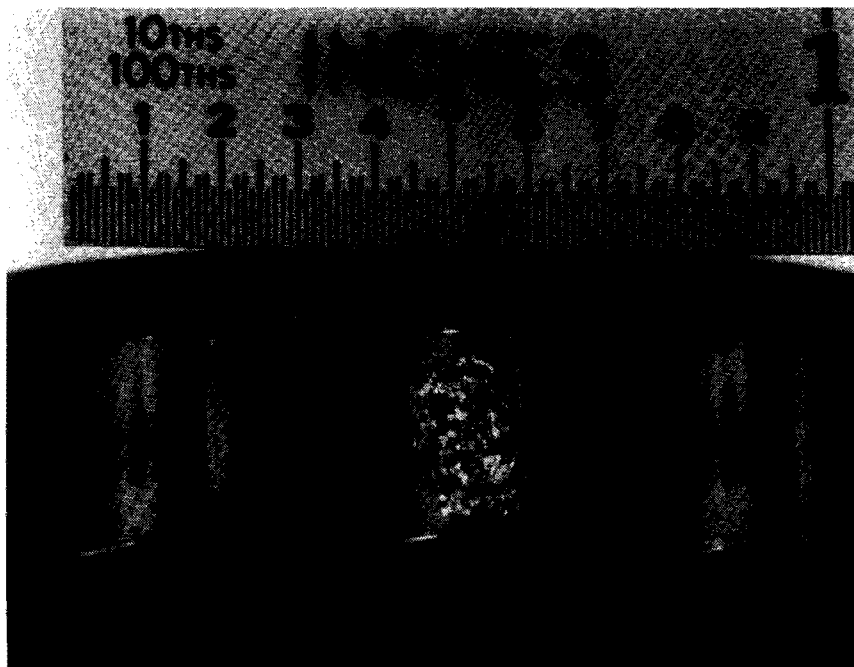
90-Degree Gearbox -407 Bearing Roller Fault C/D,
